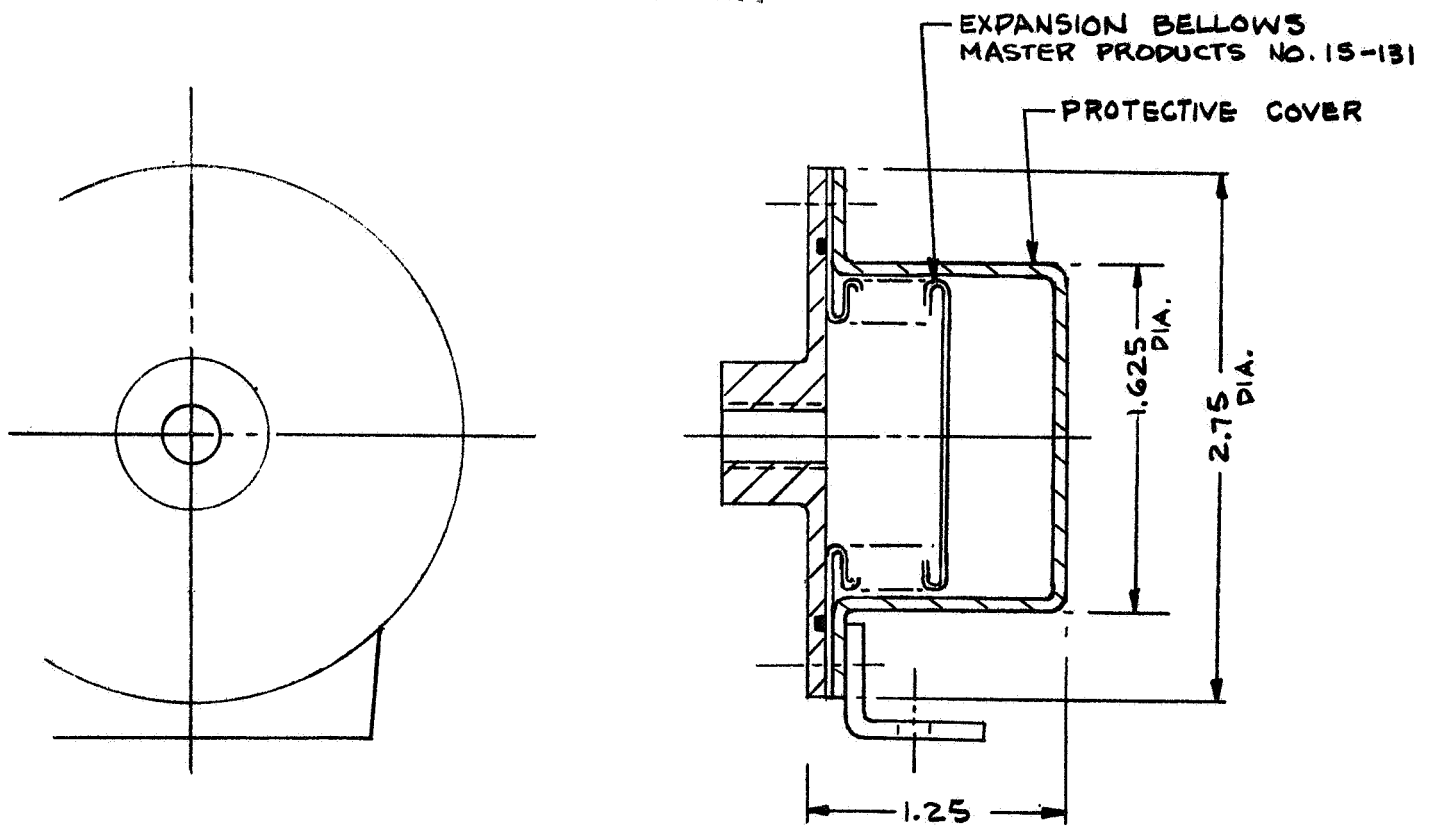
ACCUMULATOR CONSTRUCTION DETAILS (NOT TO SCALE)
